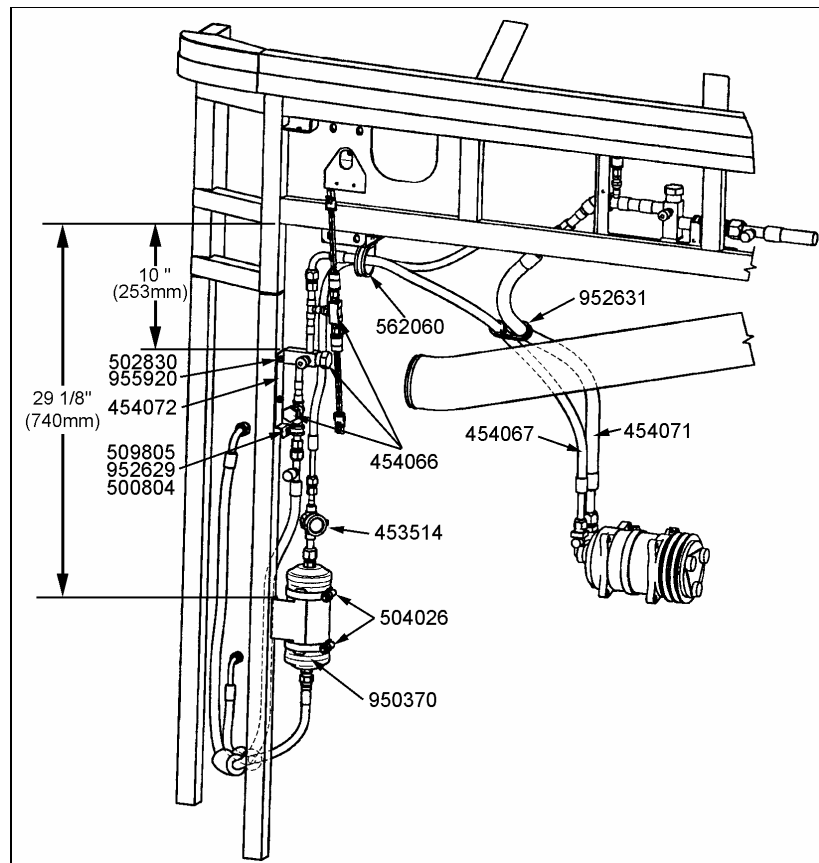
HIGH PRESSURE SERVICE VALVE & FILTER DRYER ASSEMBLY
